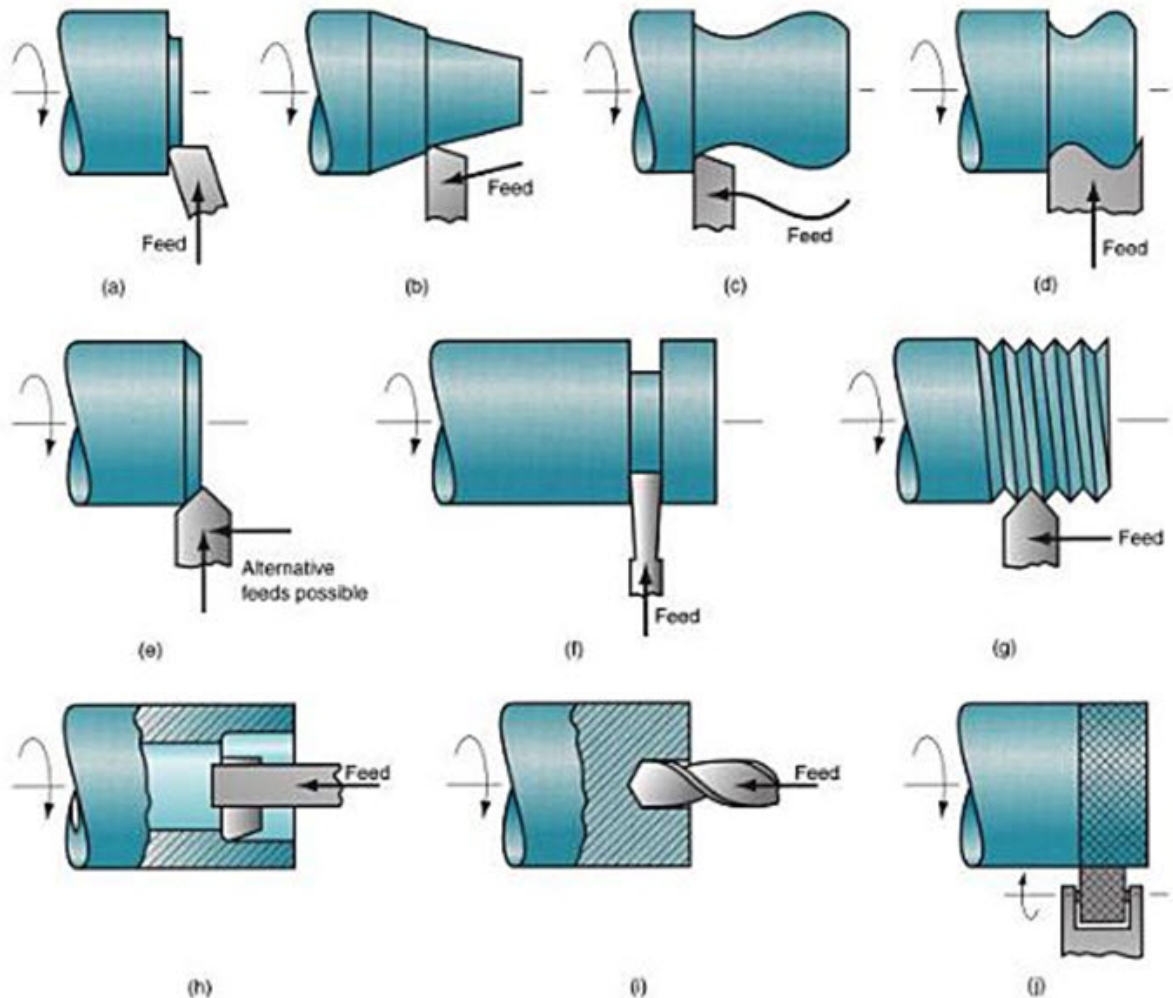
Machining operations other than turning that are performed on a lathe: (a) facing, (b) taper turning, (c) contour turning, (d) form turning, (e) chamfering, (f) cutoff, (g) threading, (h) boring, (i) drilling, and (j) knurling.
